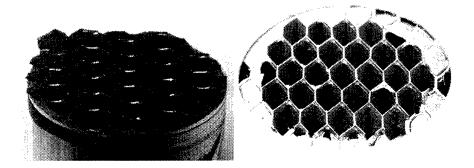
Failure surfaces resulting from tensile testing of the Dura-Core honeycomb and JD Lincoln adhesive conditioned 30 days at 70°C/100%R.H., indicating fillet bond pull-out.
